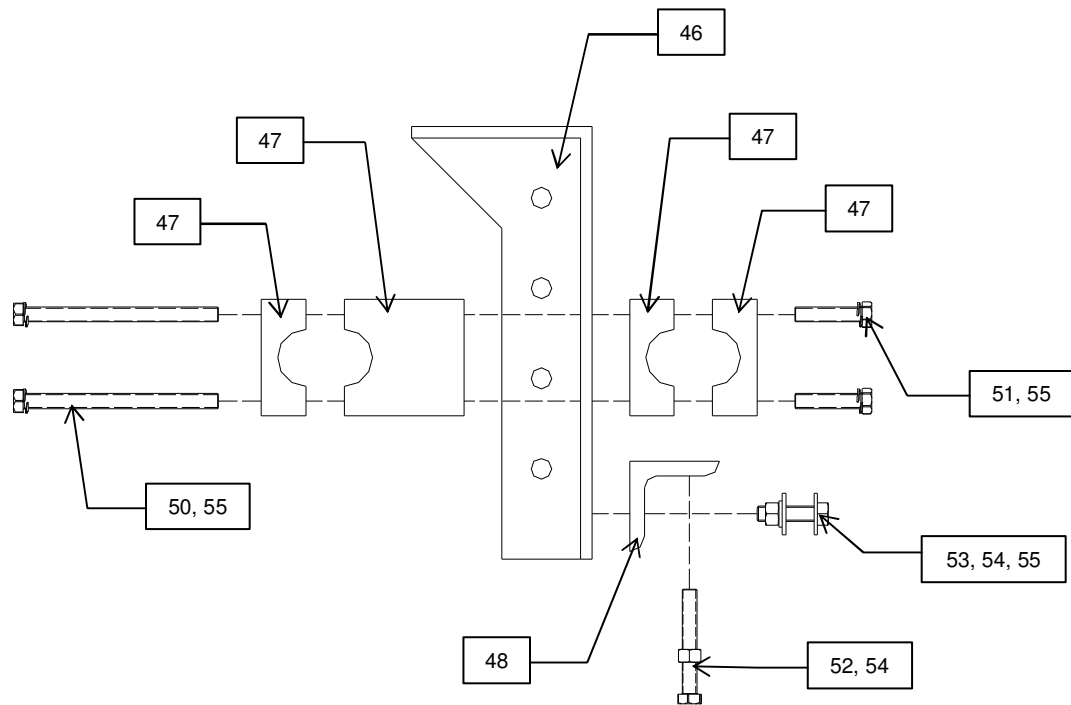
Bolt-Up Tensioner with Spray Bar Kit – Exploded View
